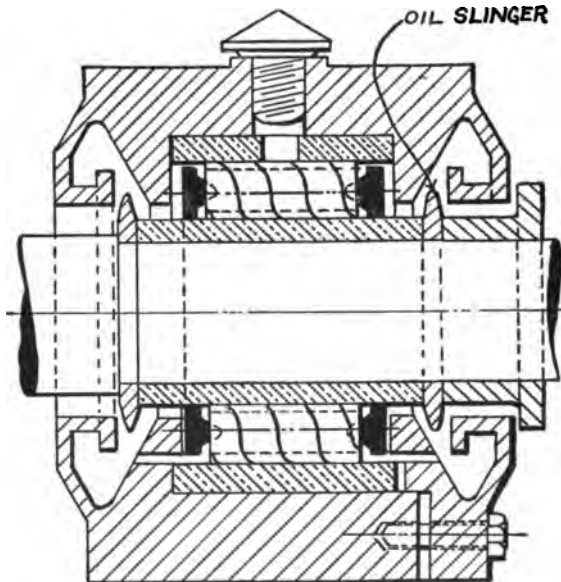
SEC. 7c.—Roller bearing with flexible rollers.
